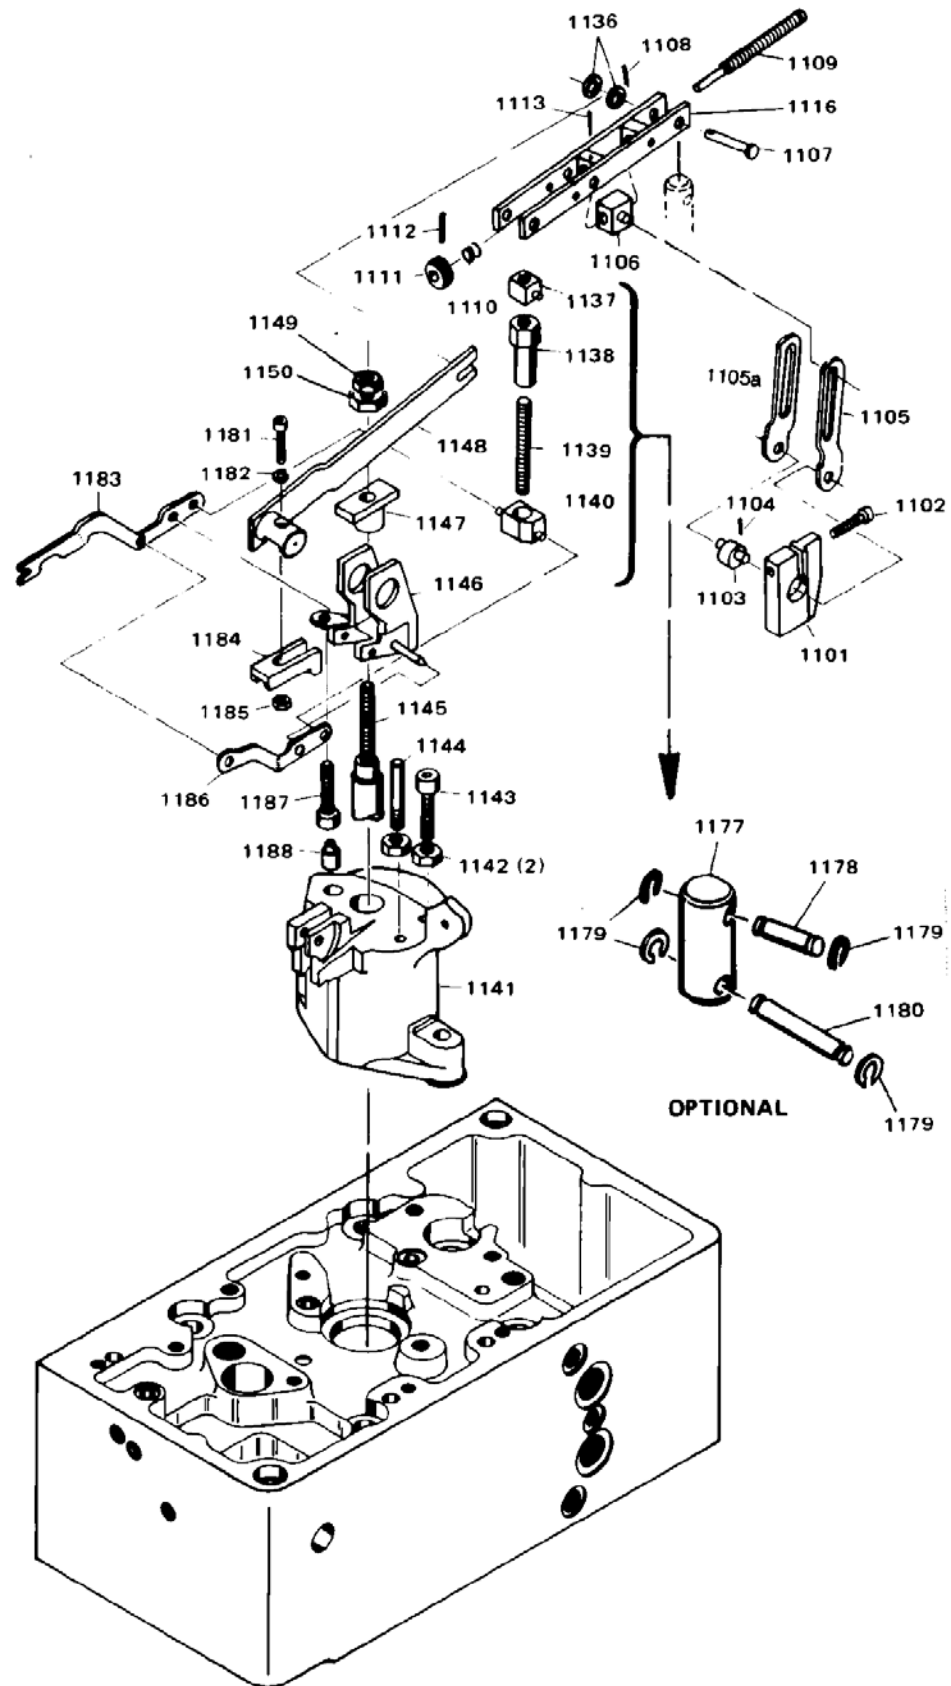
Exploded View of Adjustable Load Control Linkage
